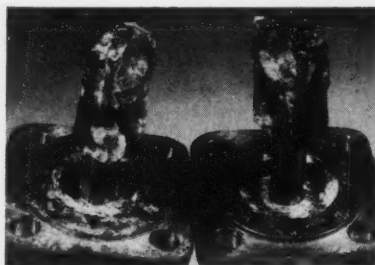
Corrosion of wedge valve with aluminum chairs. Stainless steel inserts are not shown.
